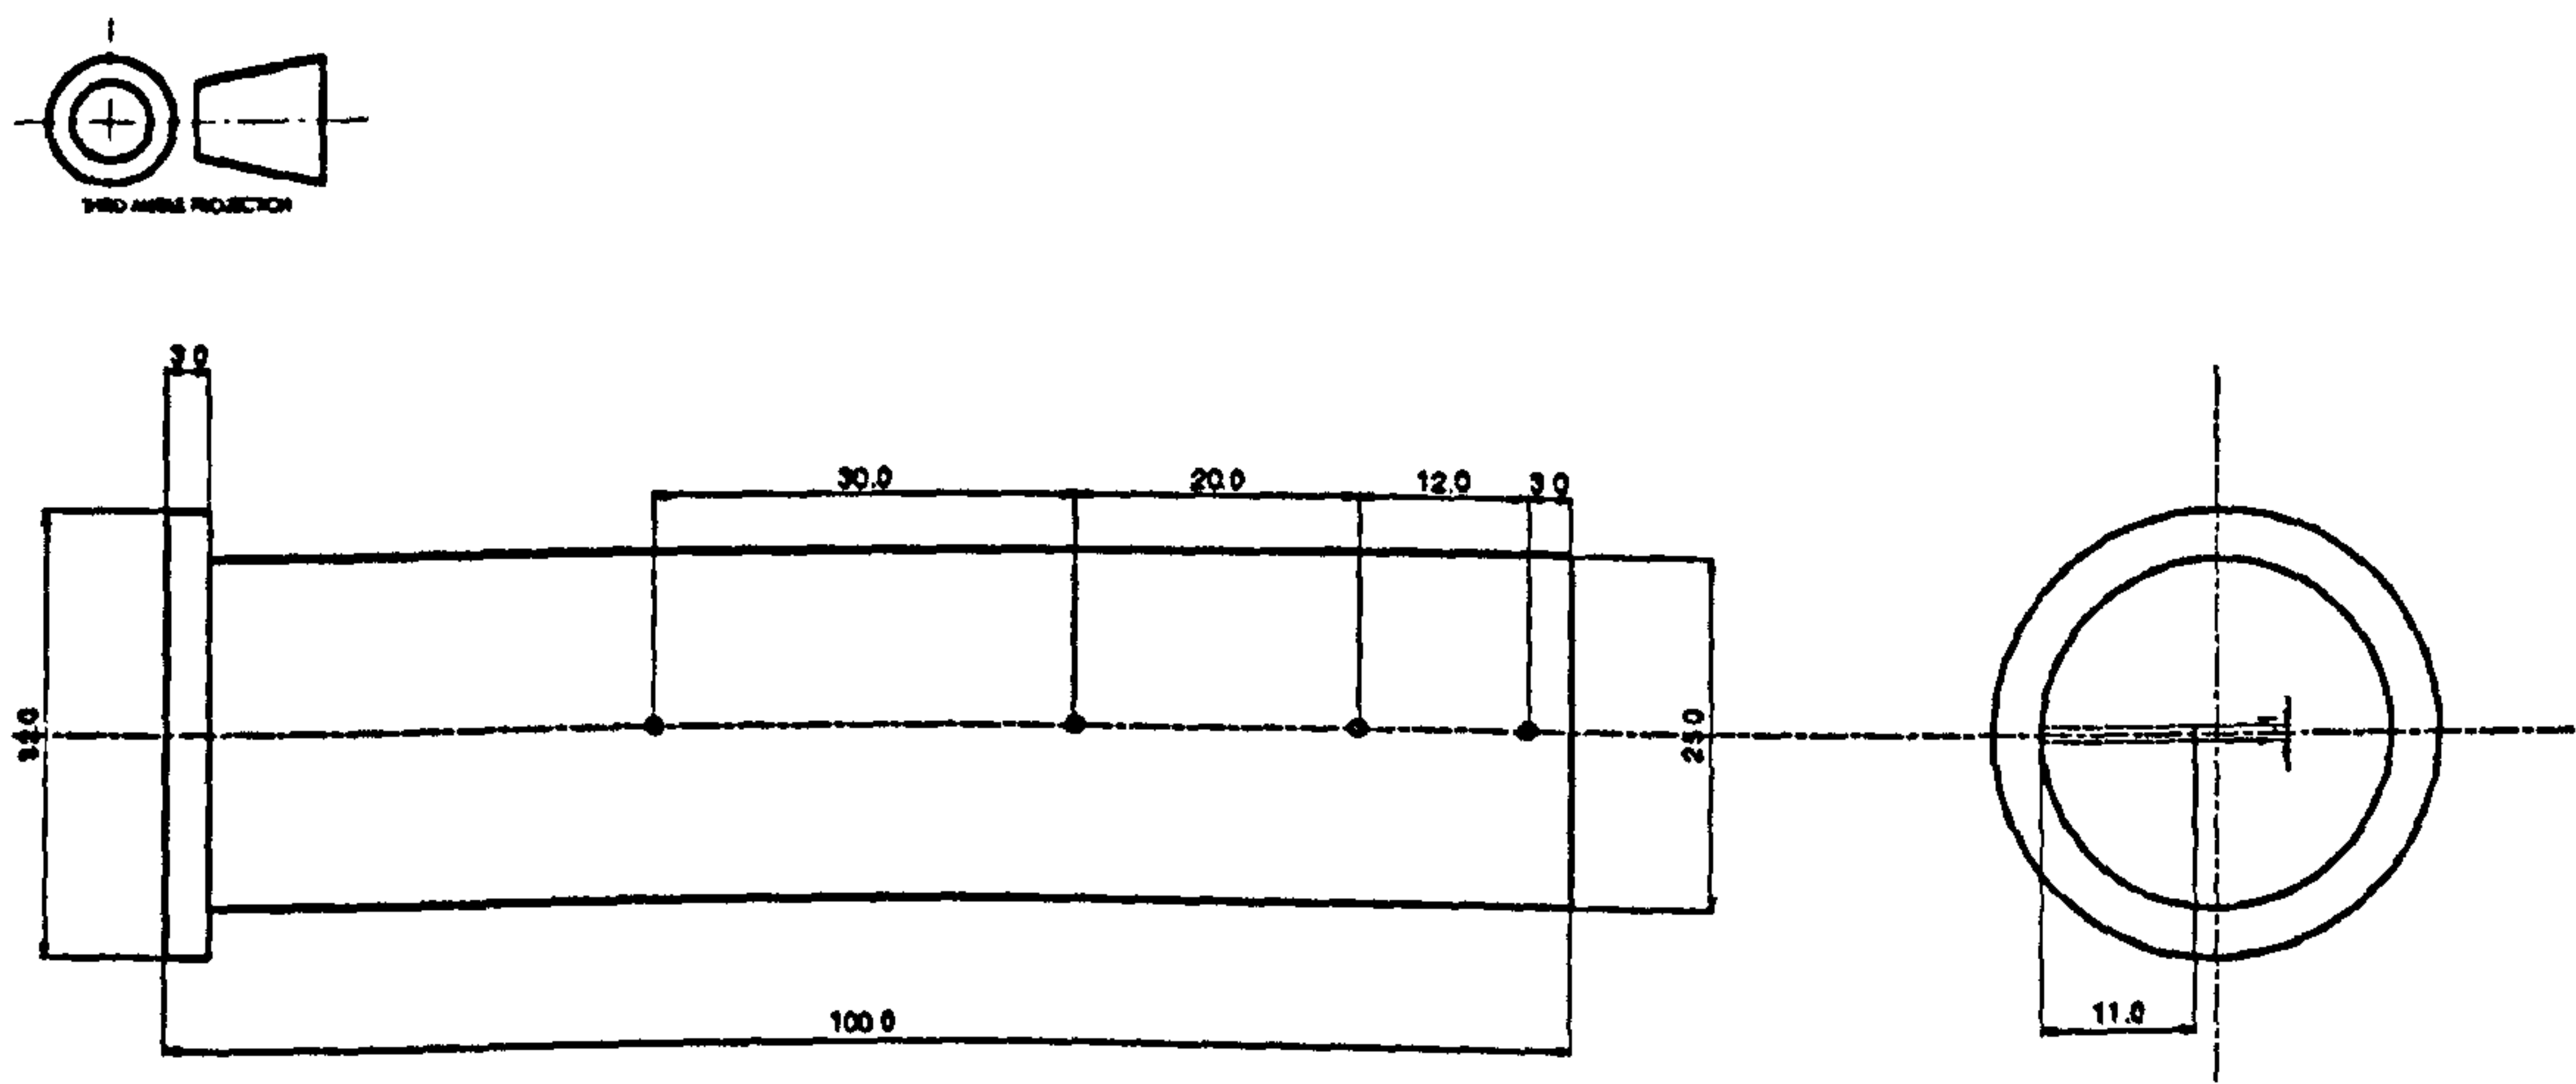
Jominy end quench specimen with thermocouple holes (dimensions in mm).
